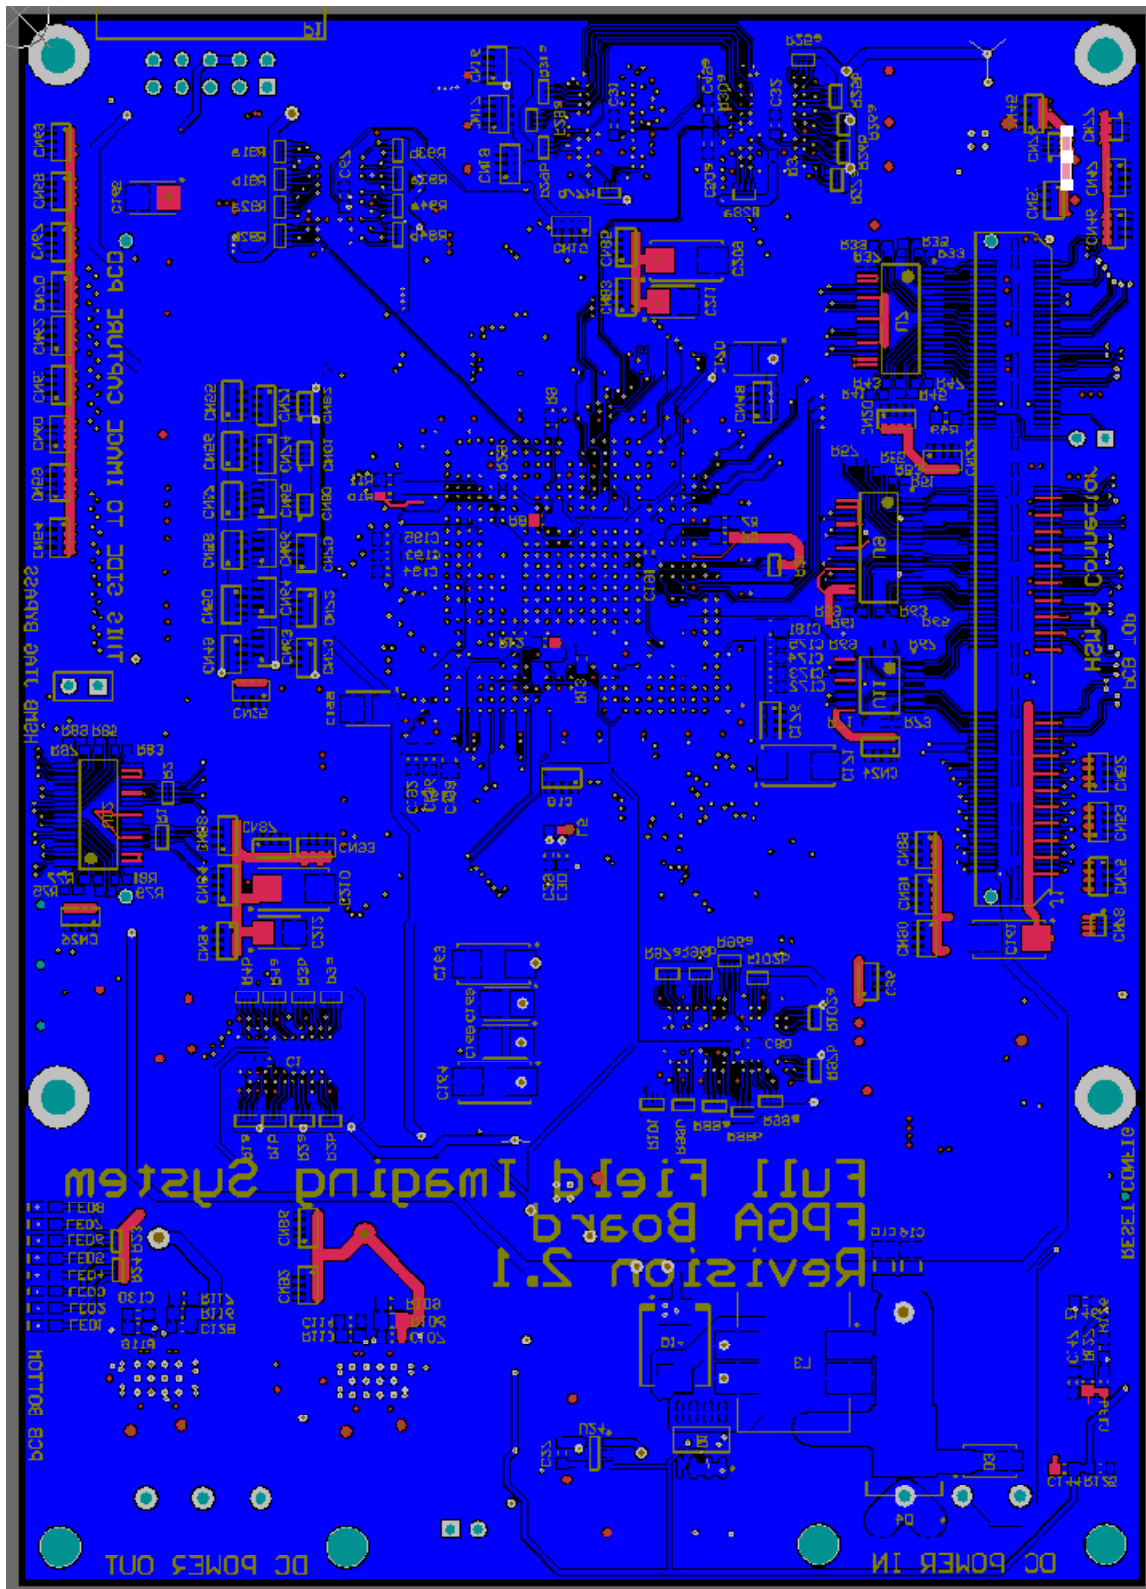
FPGA Board Rev 2.1 bottom layer
